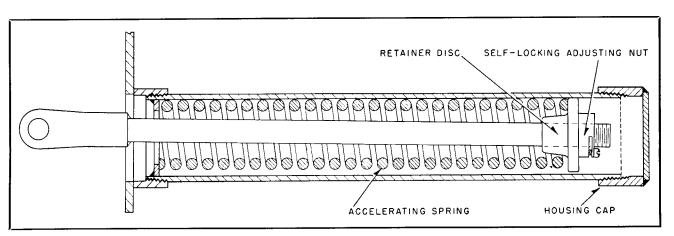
Accelerating Spring Used with Pneumatic Mechanism
